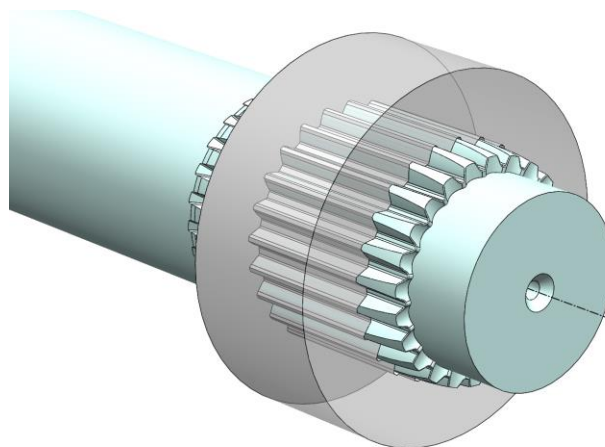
Pair of Gears – Toothed Shaft / Internal Gear
